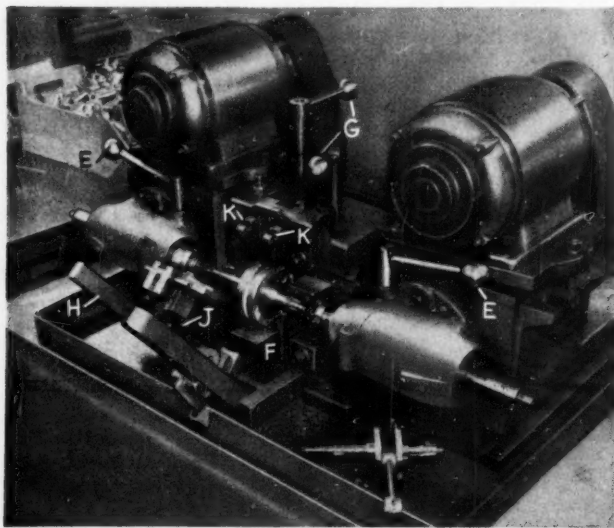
Re-cutting the Shaft Centre-holes on a Special Machine in Readiness for the Series of Grinding and Other Operations Carried Out on Crankshaft Sub-assemblies
